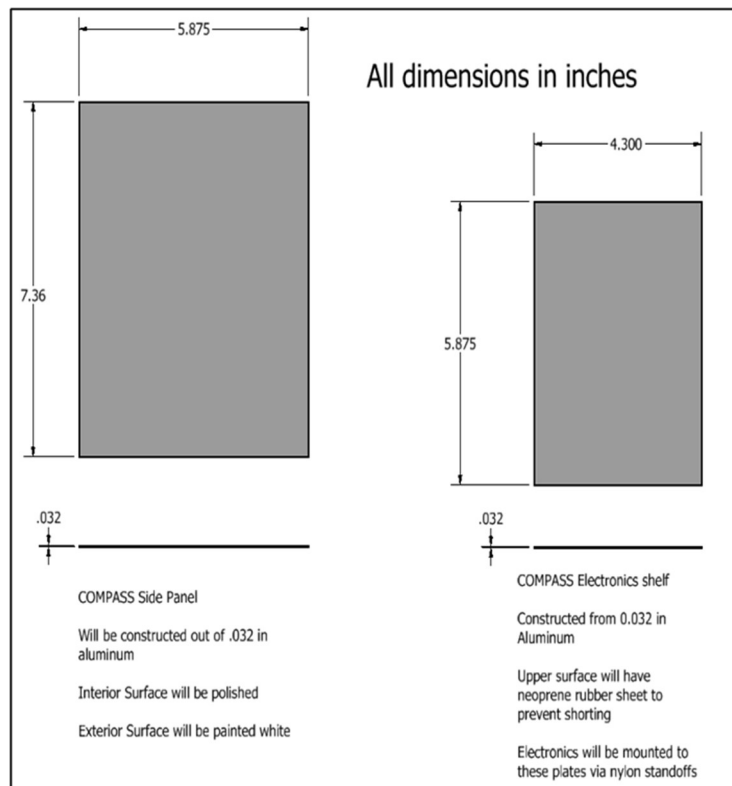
Dimensioned drawing of sheet metal side panels (left) and electronics mounting shelves (right).
